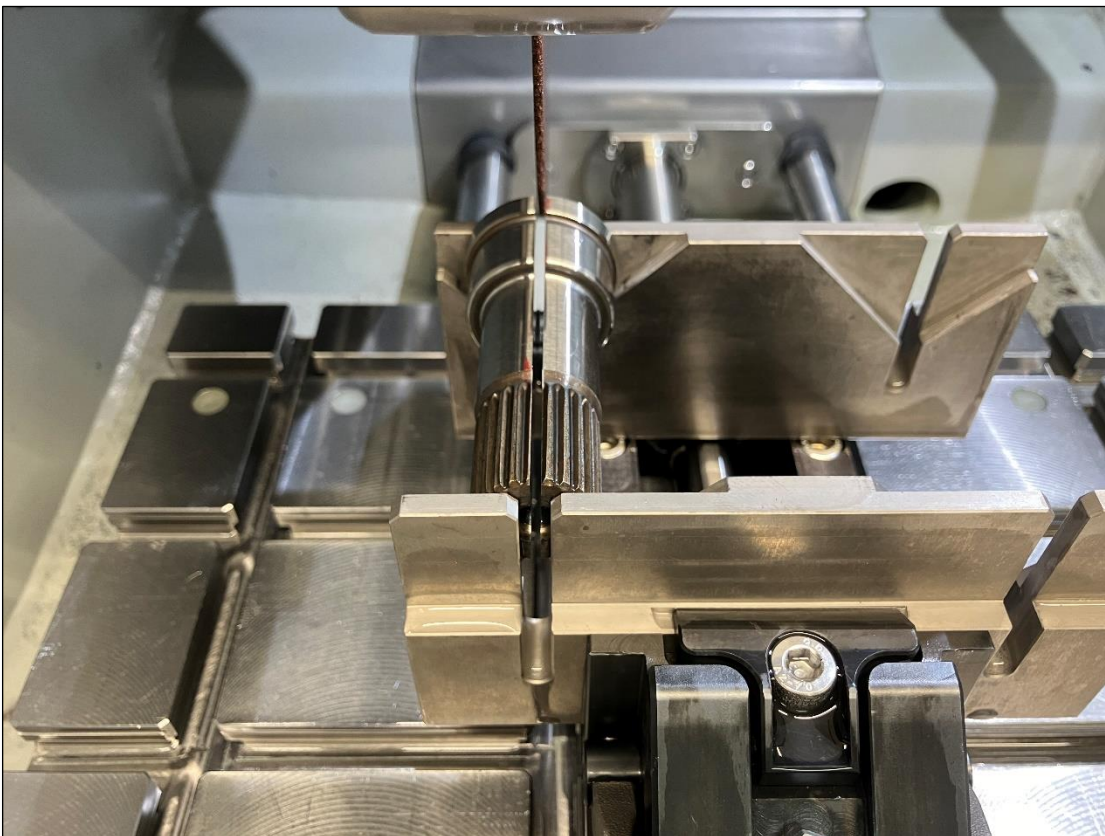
Cutting position 3 – AFTER cutting process (automatic horizontal cut with X-Axis).
